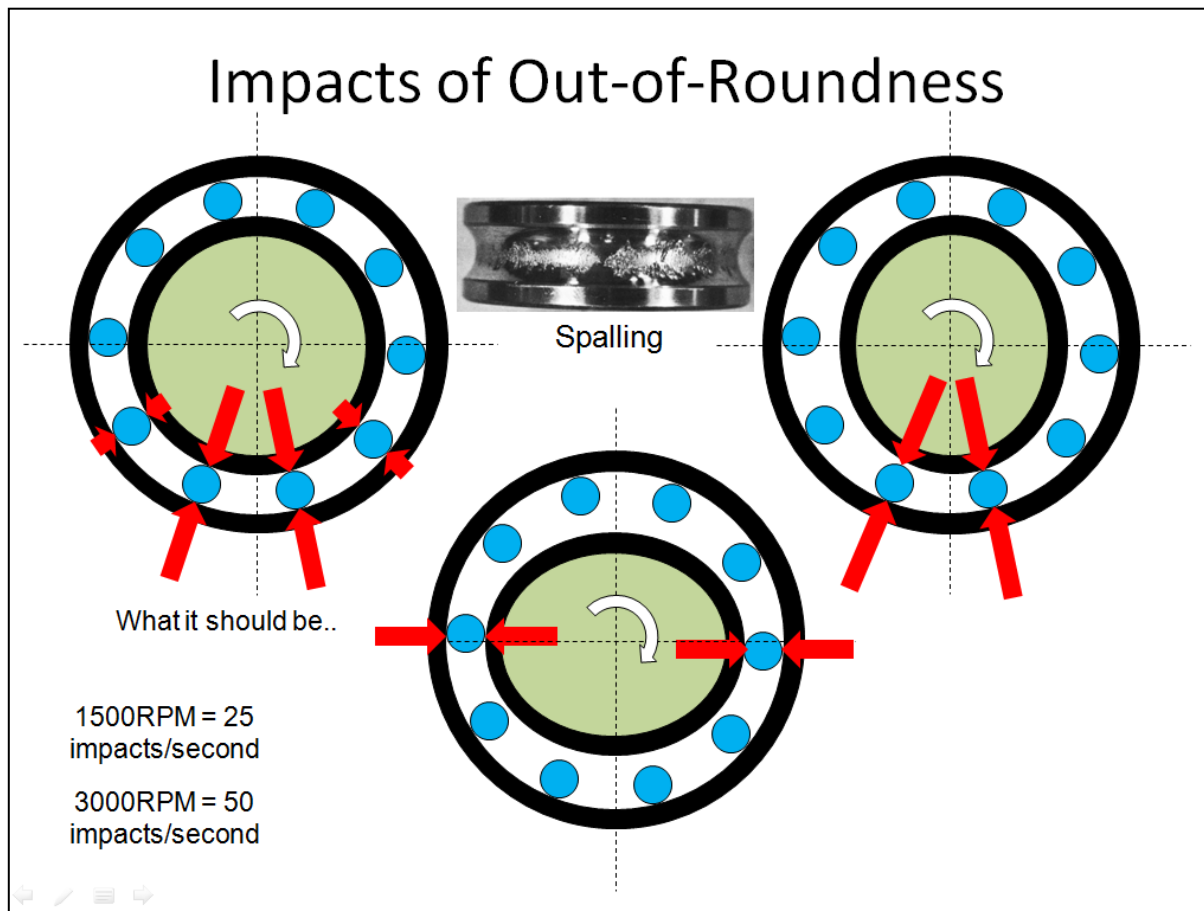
How Shaft Out-of-Roundness Causes Bearing Failure
